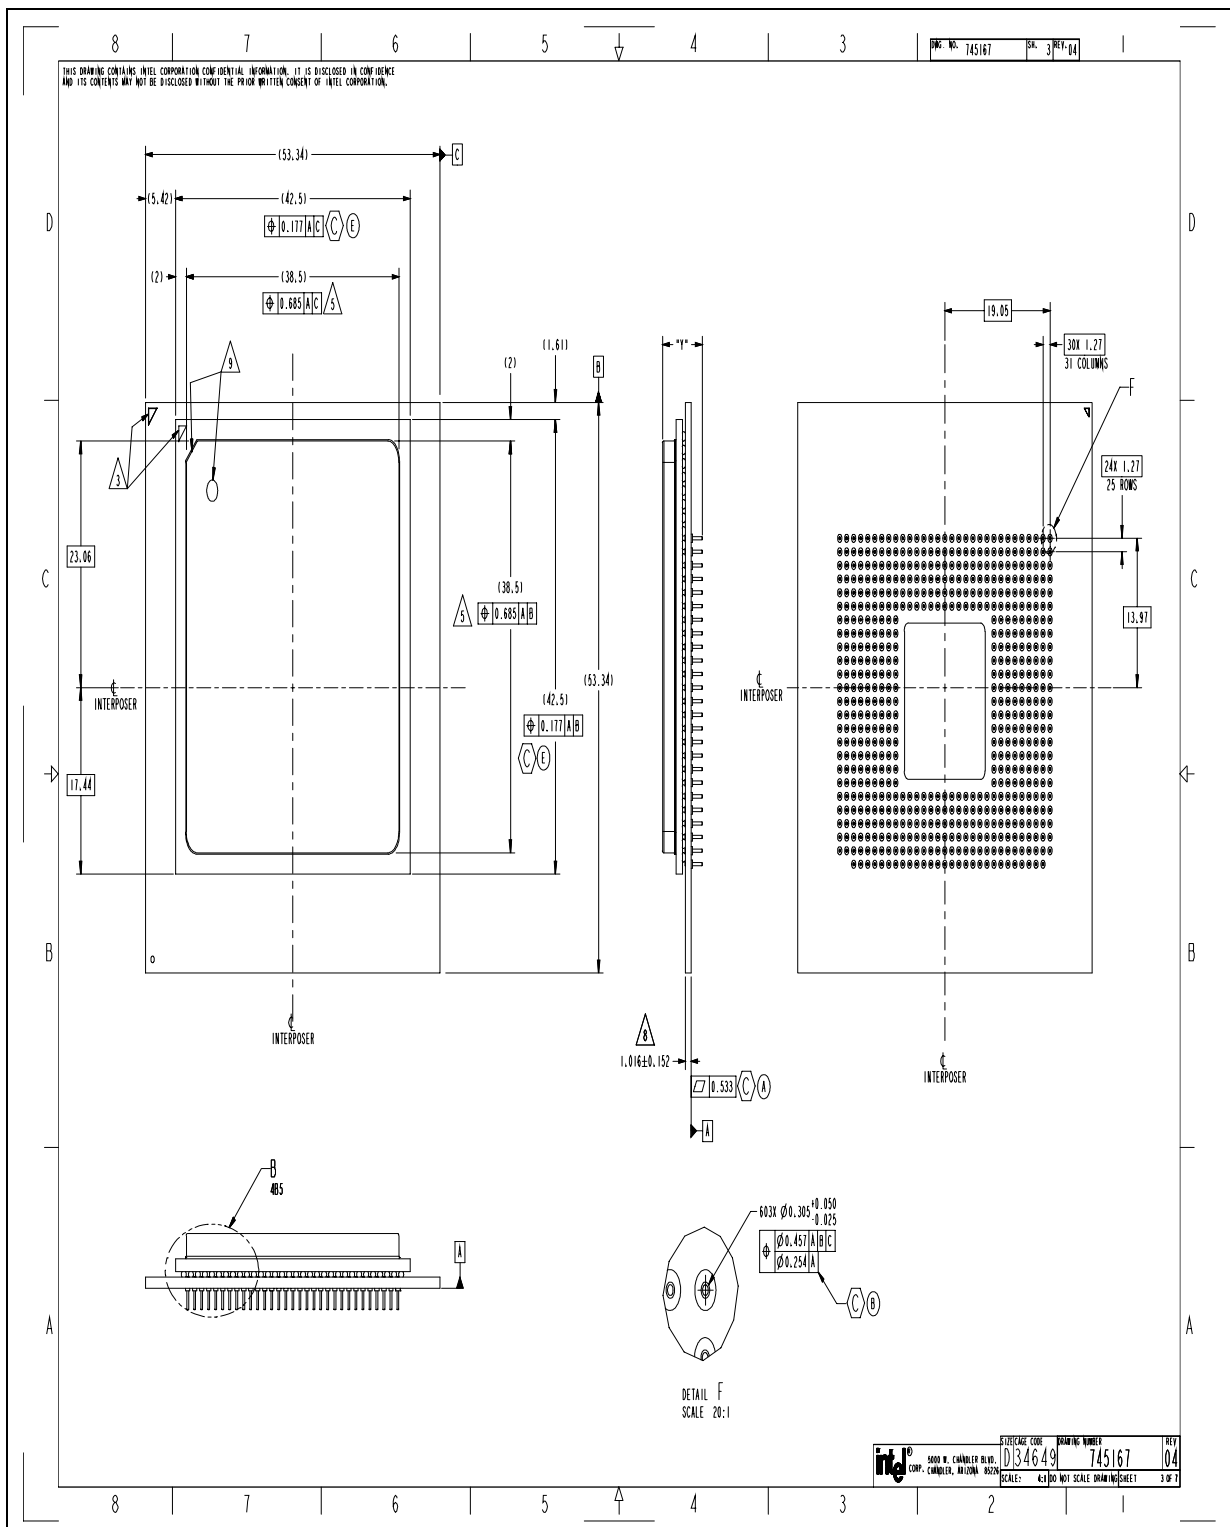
603-Pin Interposer Assembly Drawing with Dimension (Continued)
